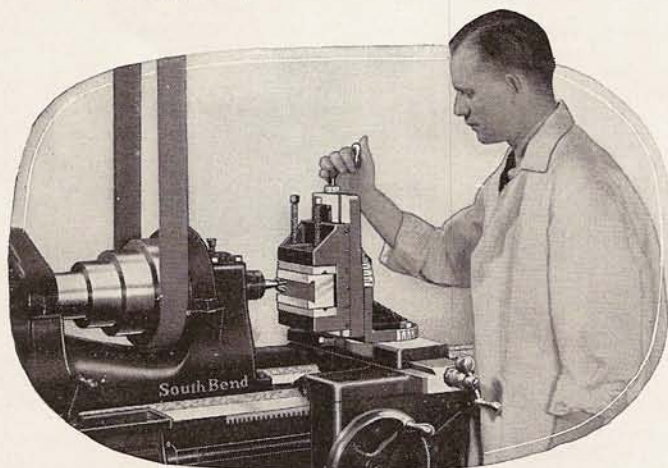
Milling a Dovetail in Lathe Using Milling Attachment.
